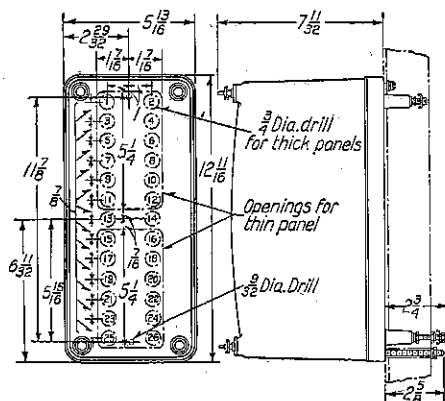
OUTLINE AND DRILLING PLAN OF THE TYPE CA-4 RELAY.
